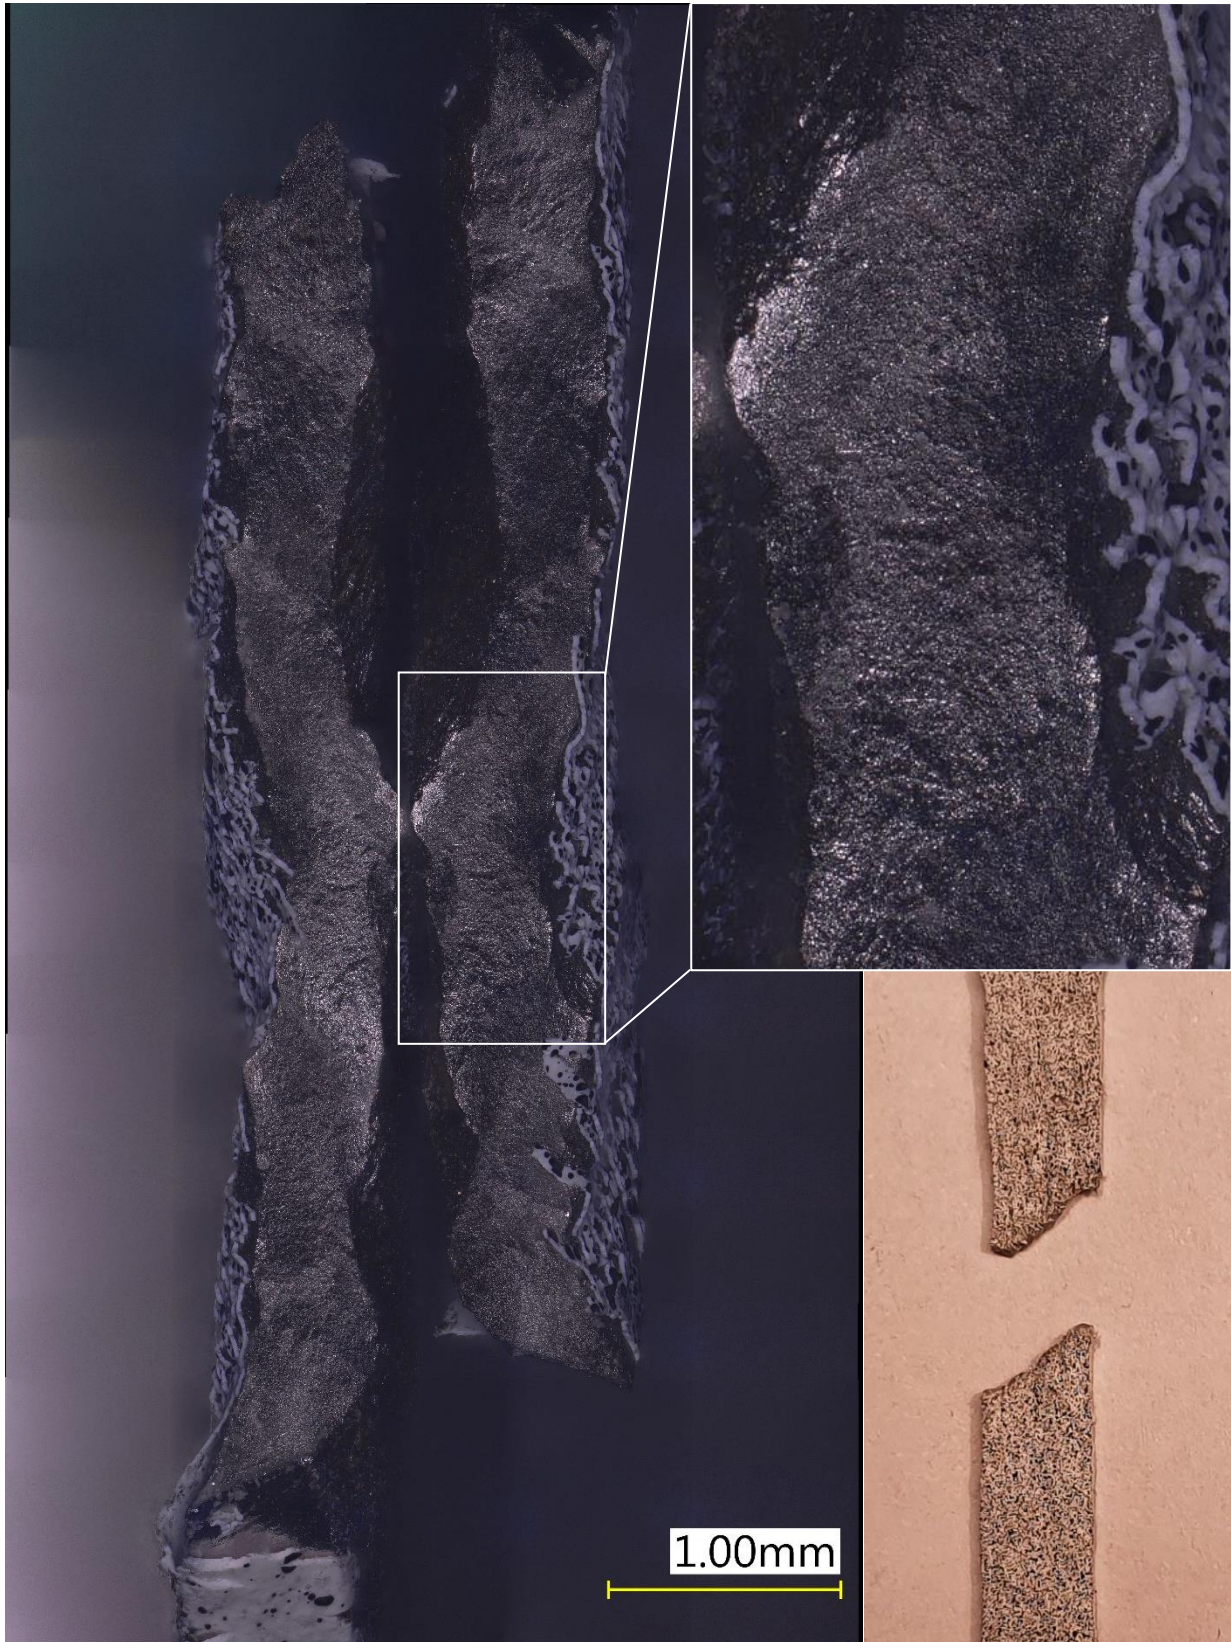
Fracture surface of a 316L LMD Y-direction sample
